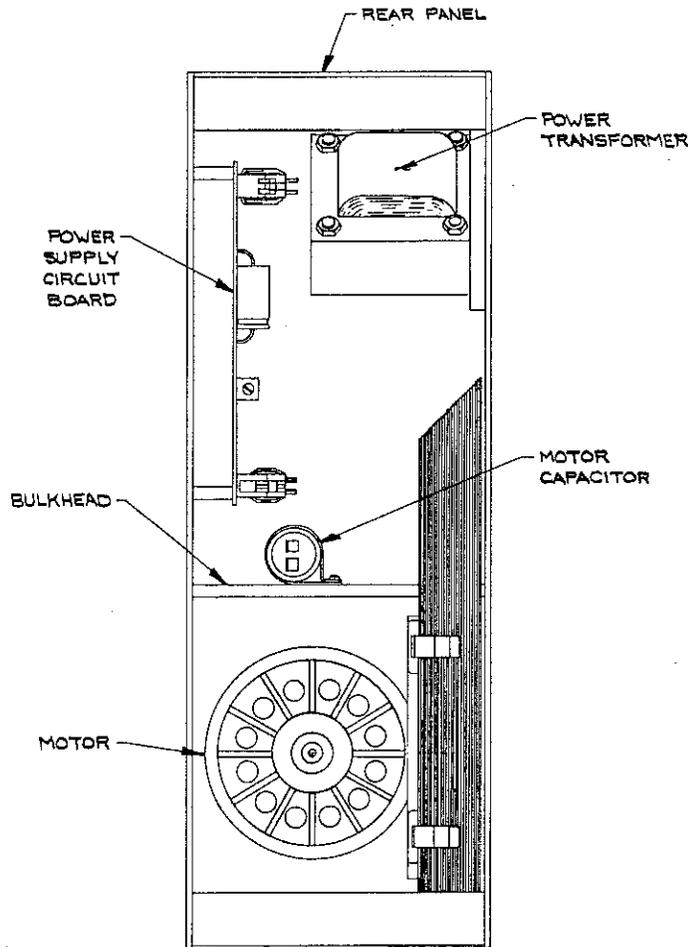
FRONT VIEW, PARTS LOCATION
